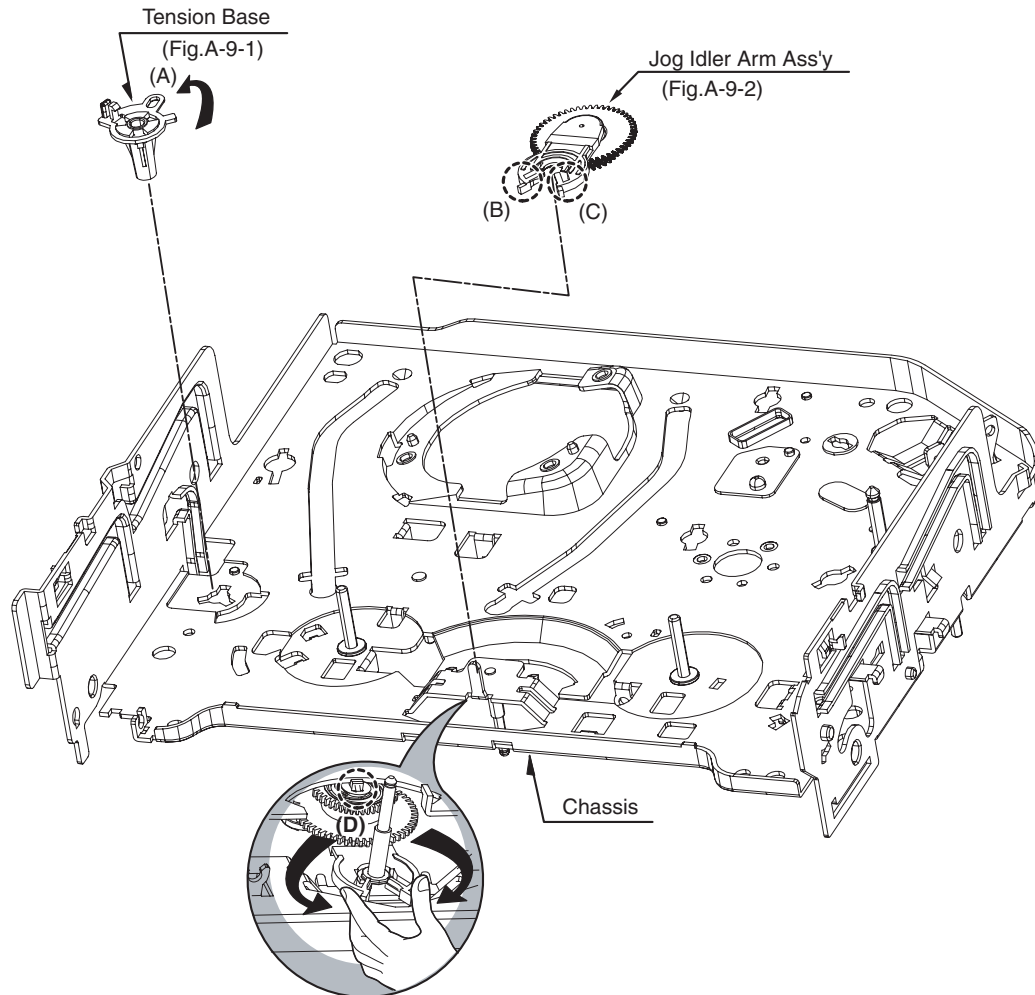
Tension Base, Jog Idler Arm Ass'y
